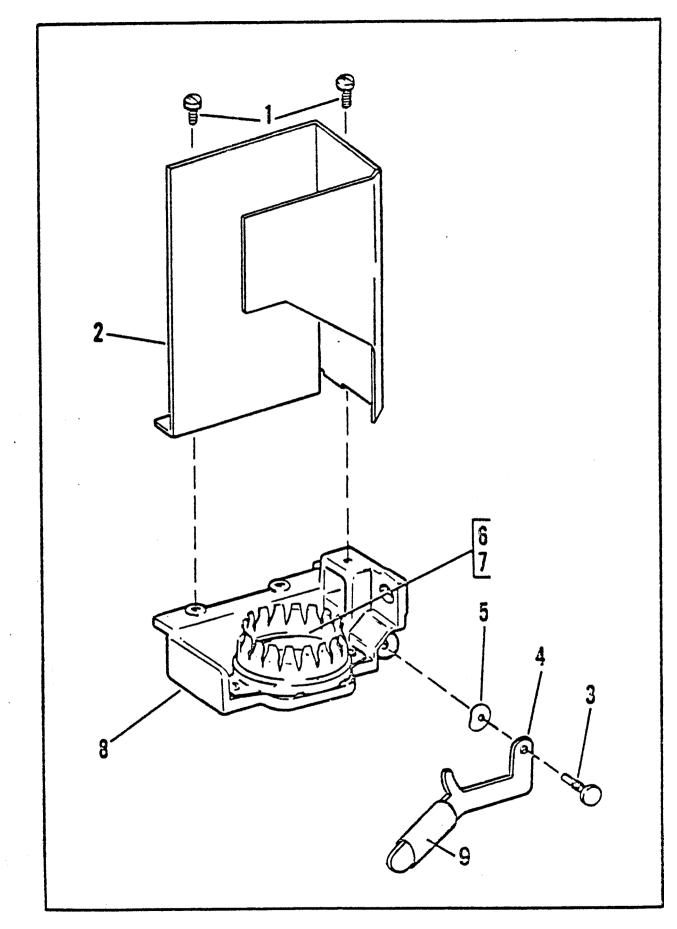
Filmosound Projector Main Plate Exploded (Sheet 2)
